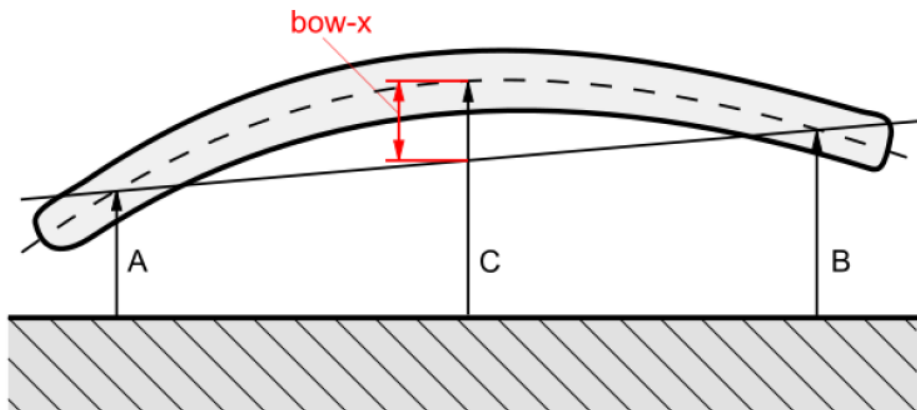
Cross-sectional View: How Bow-X is measured, *Contactless Wafer Geometry Gauge* device. Figure adopted from *Contactless Wafer Geometry Gauge Manual*, Eichhorn Hausmann, 2004
